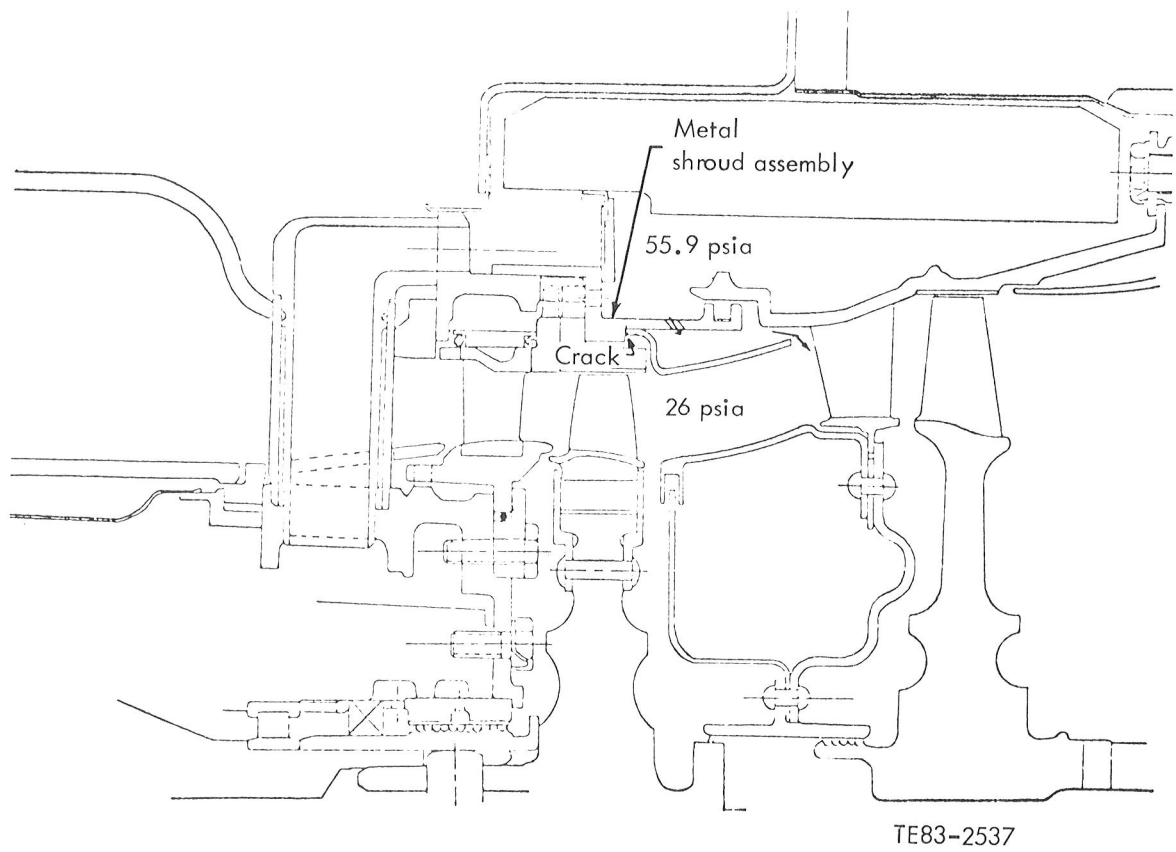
Cross section illustrating the gasifier turbine shroud assembly.
